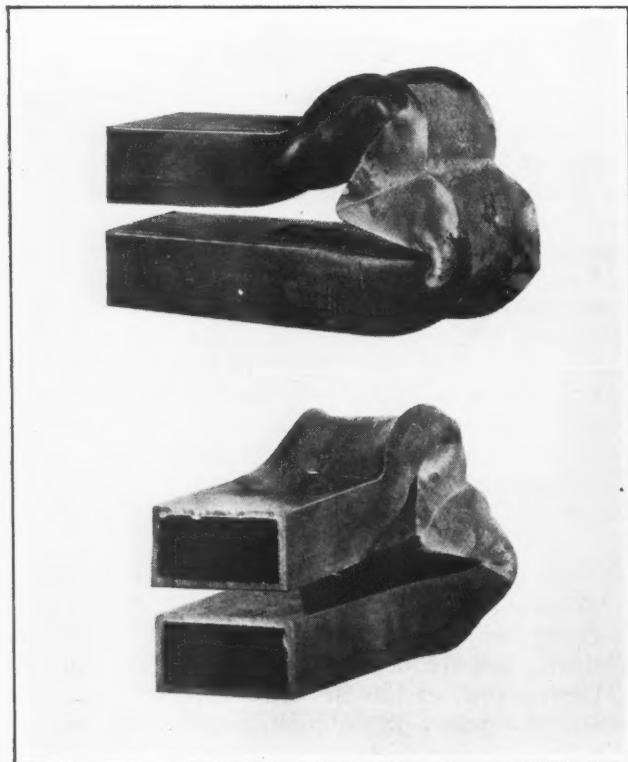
Brazing Connections in Squirrel-Cage Type of Motor with Silver Solder
